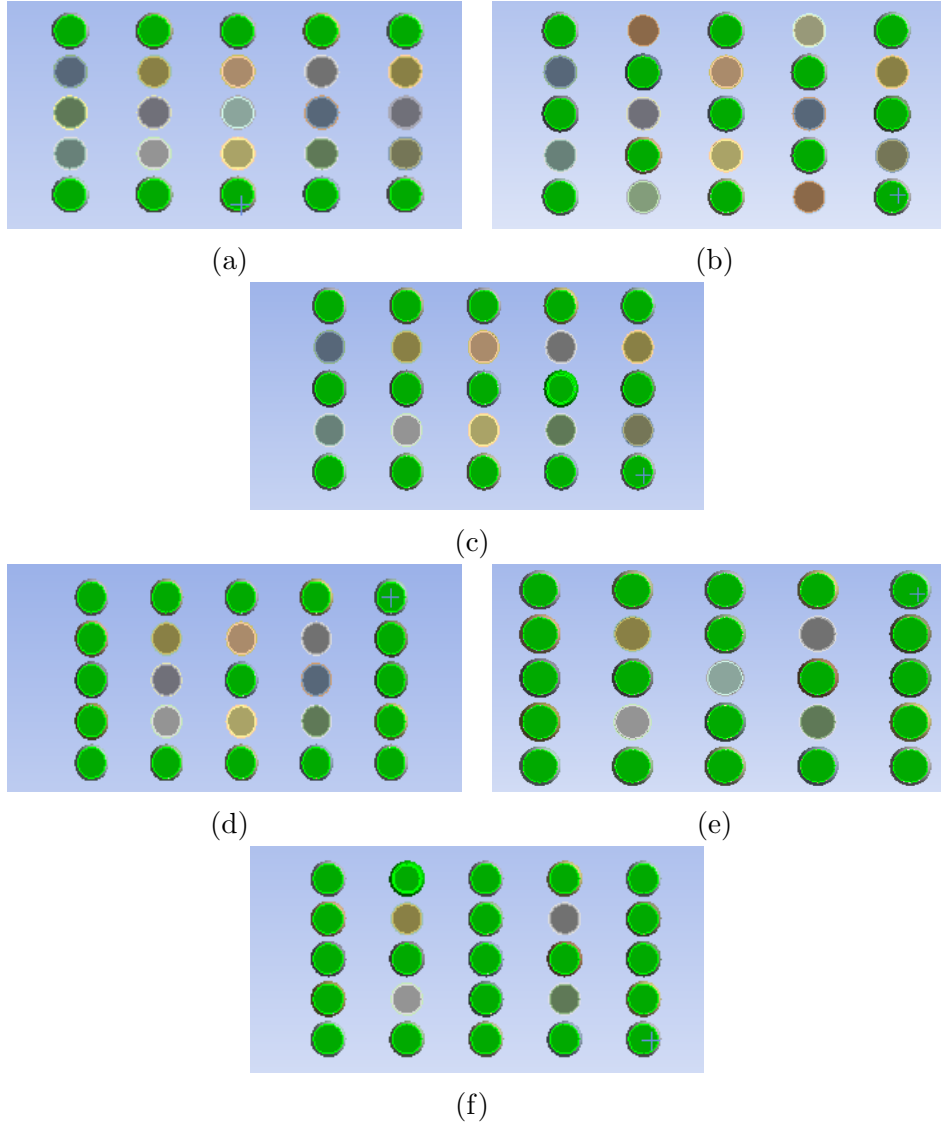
The pattern of the solder joint arrangement, where the green part is the solder joint. (a)10 solder joint, (b)13 solder joint, (c)15 solder joint, (d)17 solder joint, (e)20 solder joint, (f)21 solder joint.
